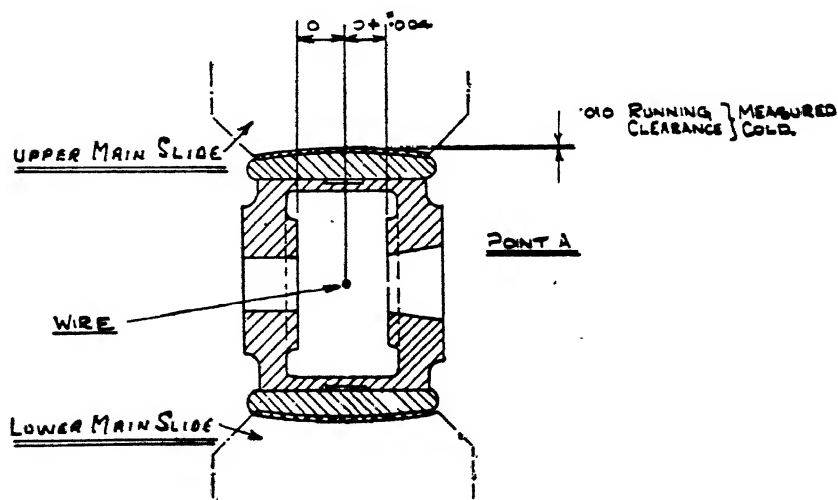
MEASUREMENTS AT POINT A TAKEN BETWEEN FACES INSIDE CROSSHEAD
